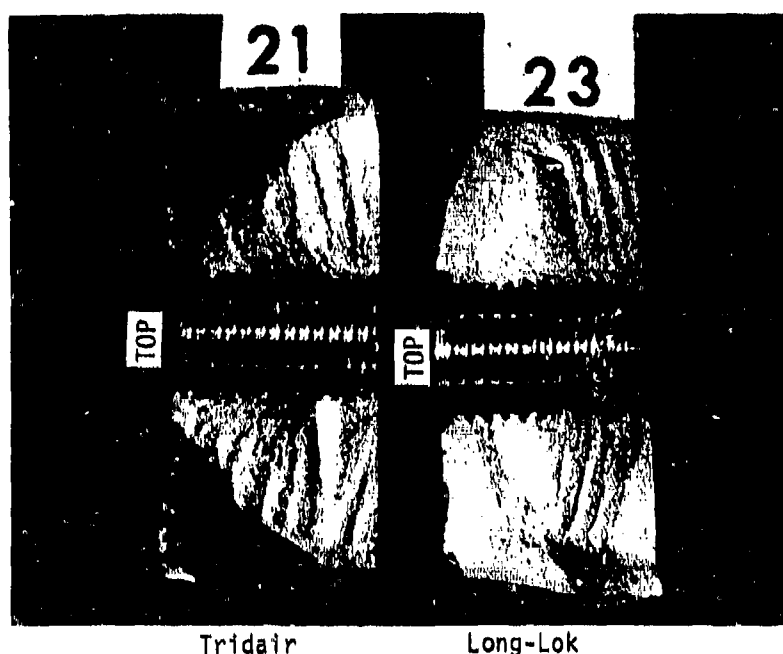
Close-up of Fatigue Failures of Specimens with Tridair and Long-Lok 1/4-28 Size Inserts. Inserts Installed by Manufacture. Torqued Bolts in Inserts During Tests.
